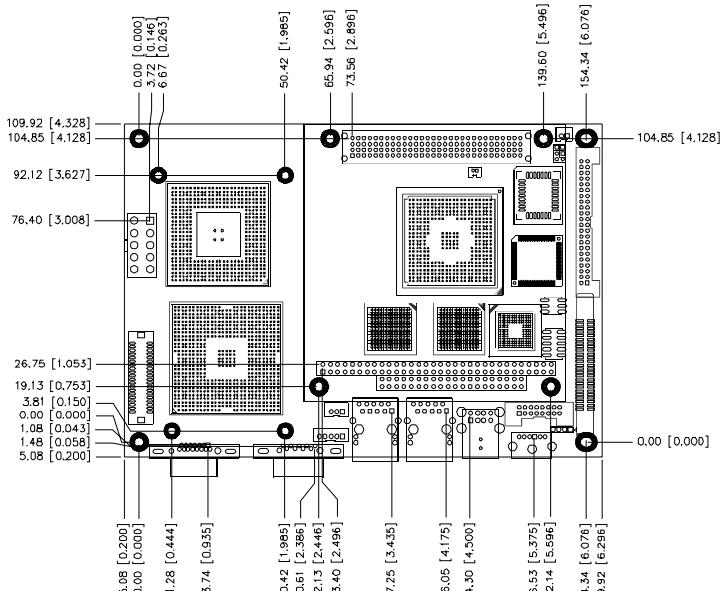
PCM-4386 Mechanical Drawing (Component Side)
